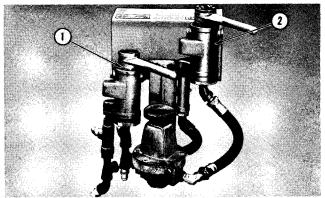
REAR DUMP HAND BRAKE VALVES
